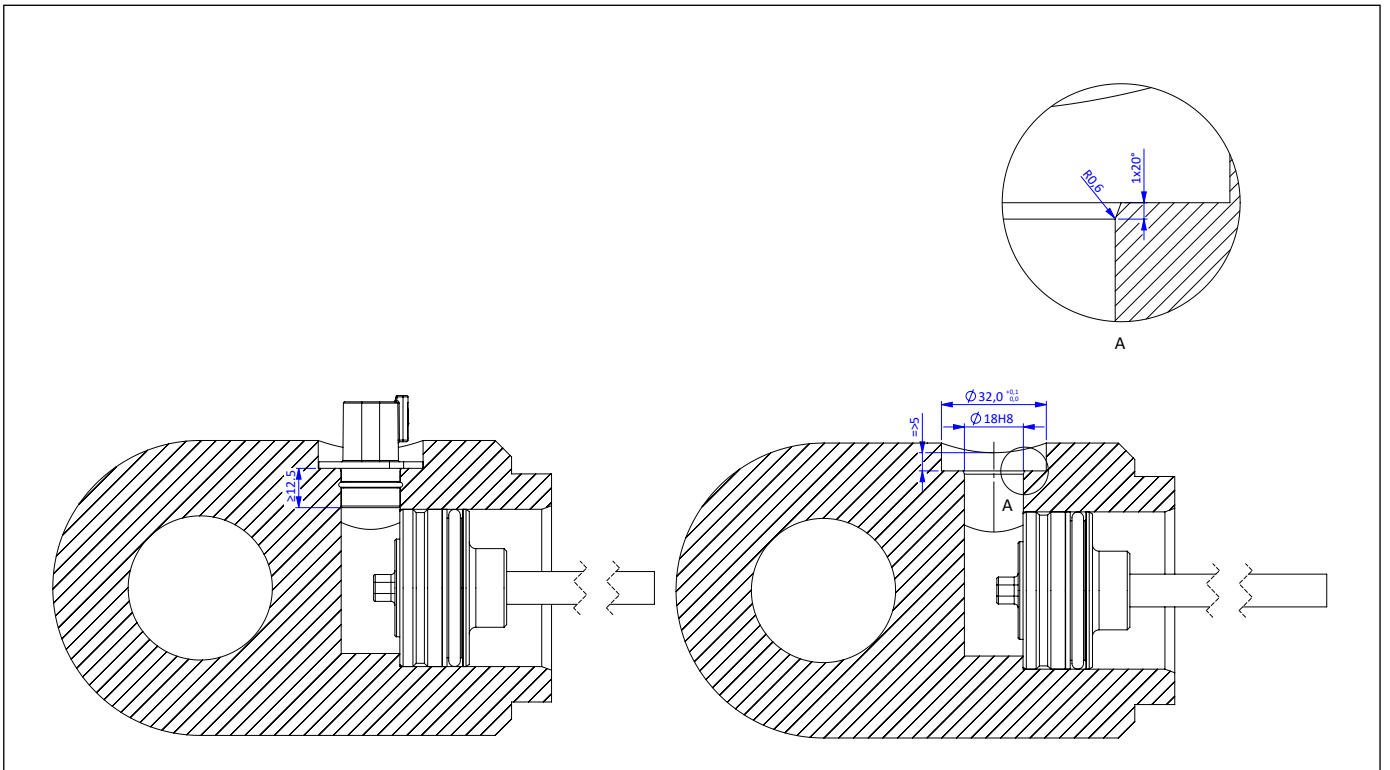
Dimensions of related bore holes and tolerances, 1-piece version
